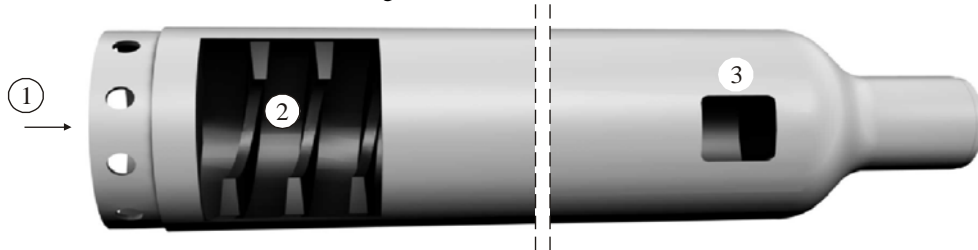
Cast monolithic muffle for continuous drum furnace [5]: 1 - loading of charge, 2 - internal helical baffle, 3 - discharge door, material: GX40CrNiSi25-20, GX40NiCrSi35-17 or GX40NiCrSiNb38-19
